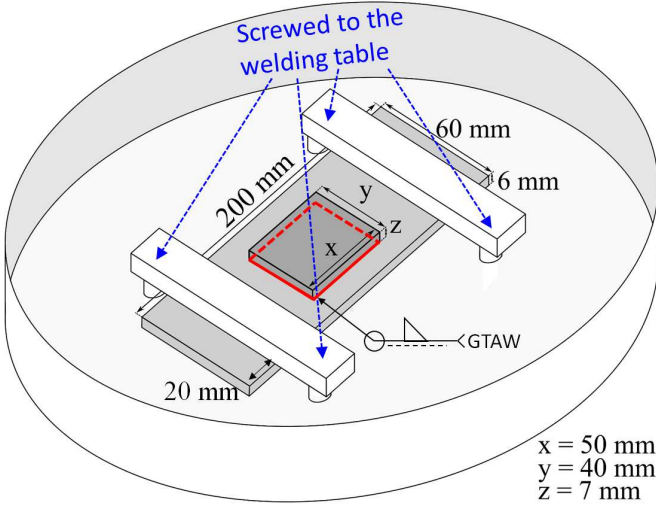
Experimental RCT setup. x, y and z are the specimen dimensions. The specimen is GTAW-welded onto a steel plate along the red line. The clamps are screwed to the welding table.
